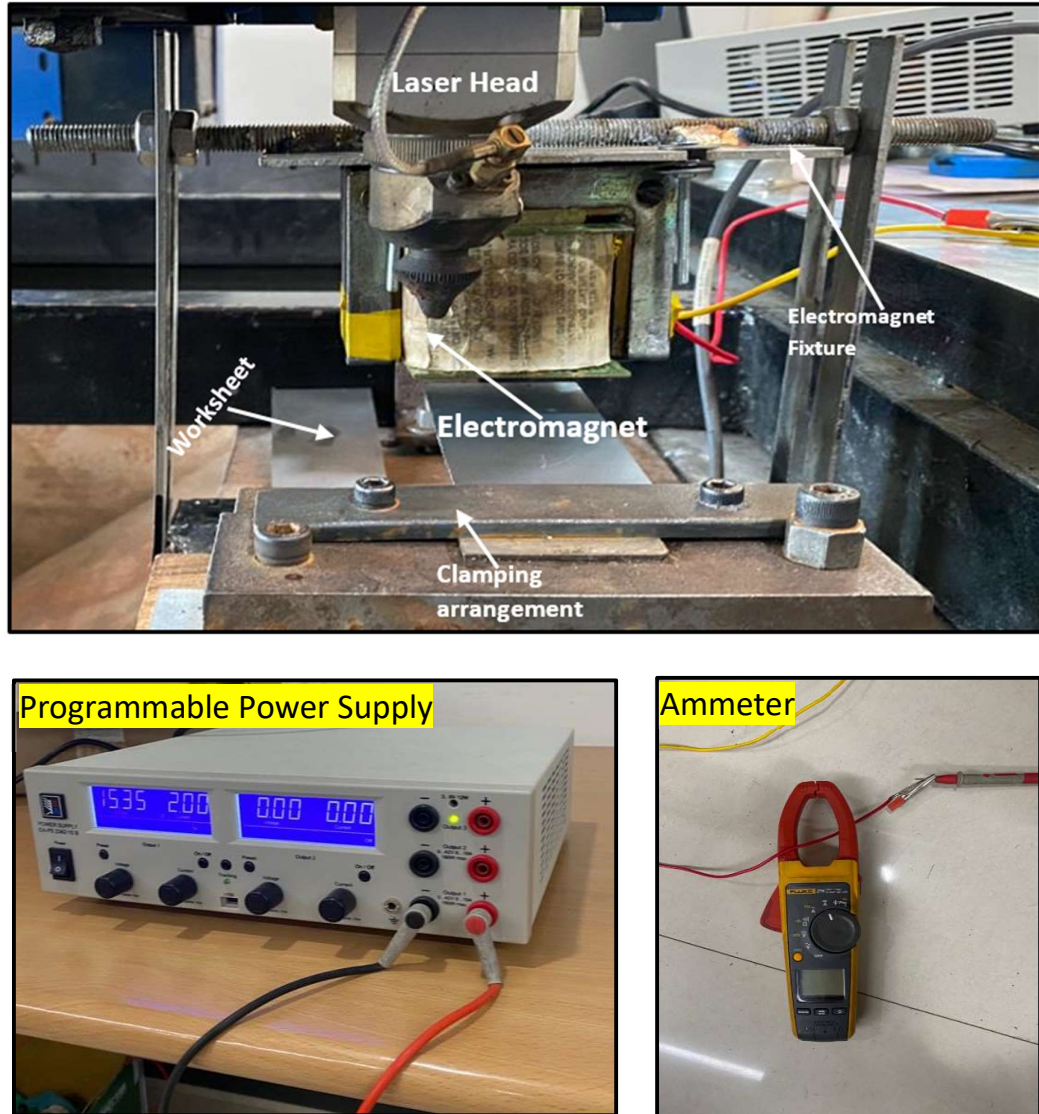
Electromagnetic force-assisted laser bending components.
